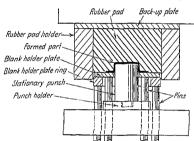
Schematic view of deep drawing by the rubber-pad process.
